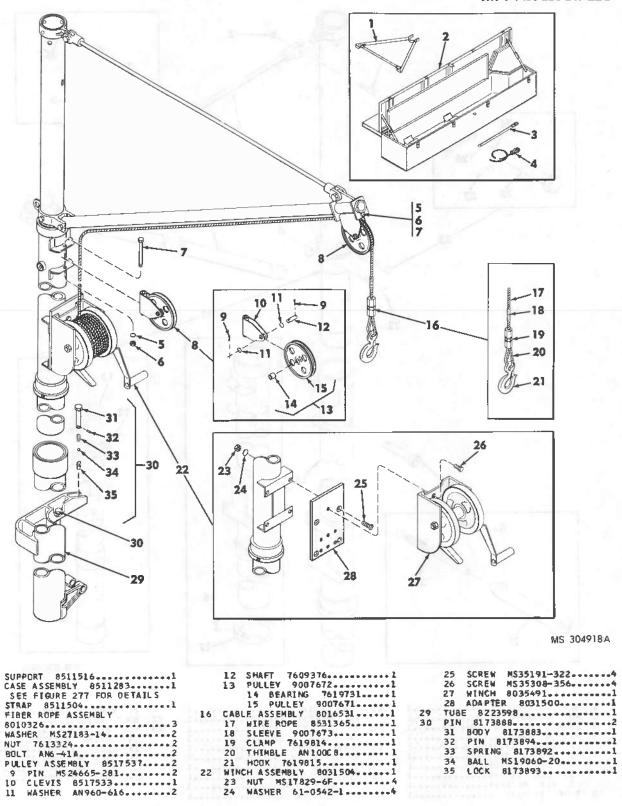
HOIST ASSEMBLY, ANTENNA /8173930/-PARTIAL EXPLODED VIEW /SEE FIGURE 2 FOR NEXT HIGHER ASSEMBLY/
